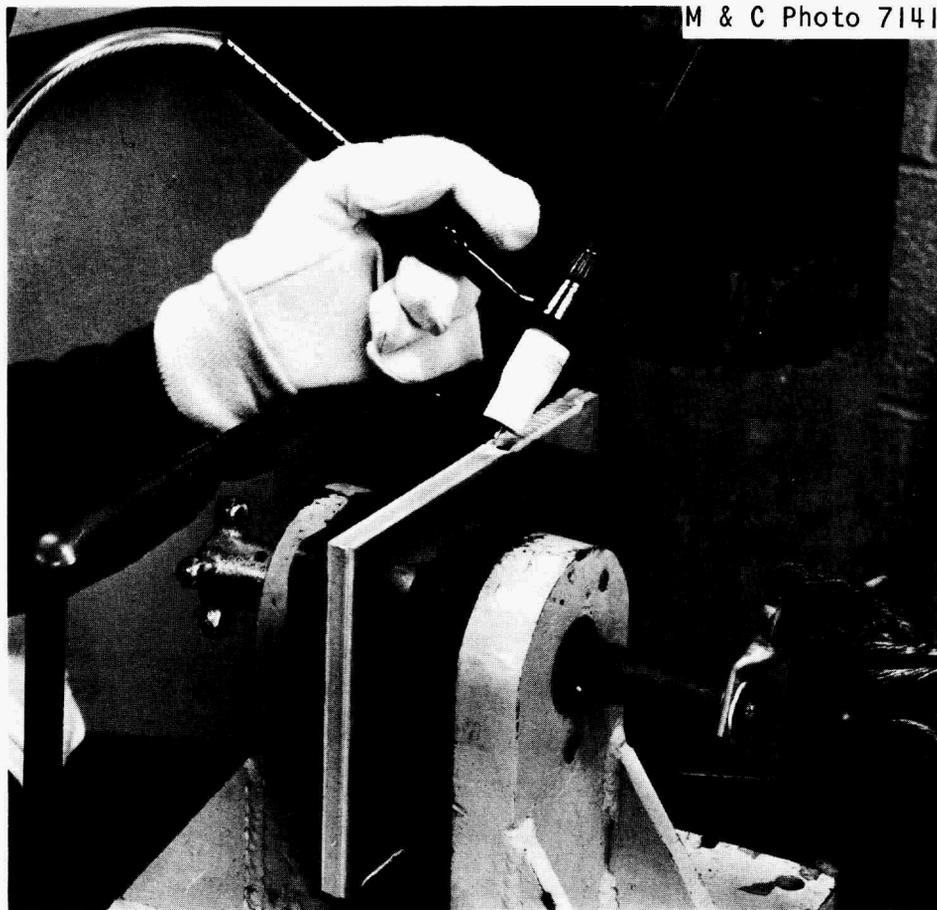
Welding Assembled Fuel Package Billet.
